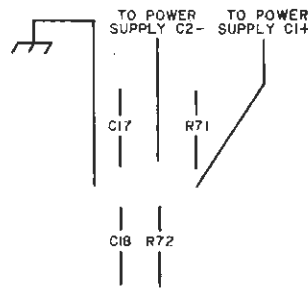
Special wiring of the main pc board for use with an ac power supply.
